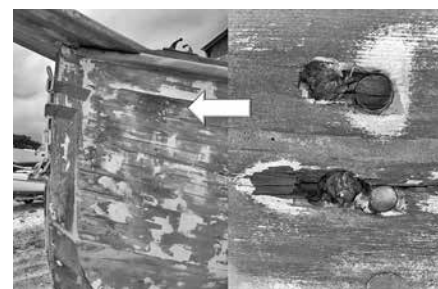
The taboo mixing of bronze and iron fasteners led to galvanic damage.
